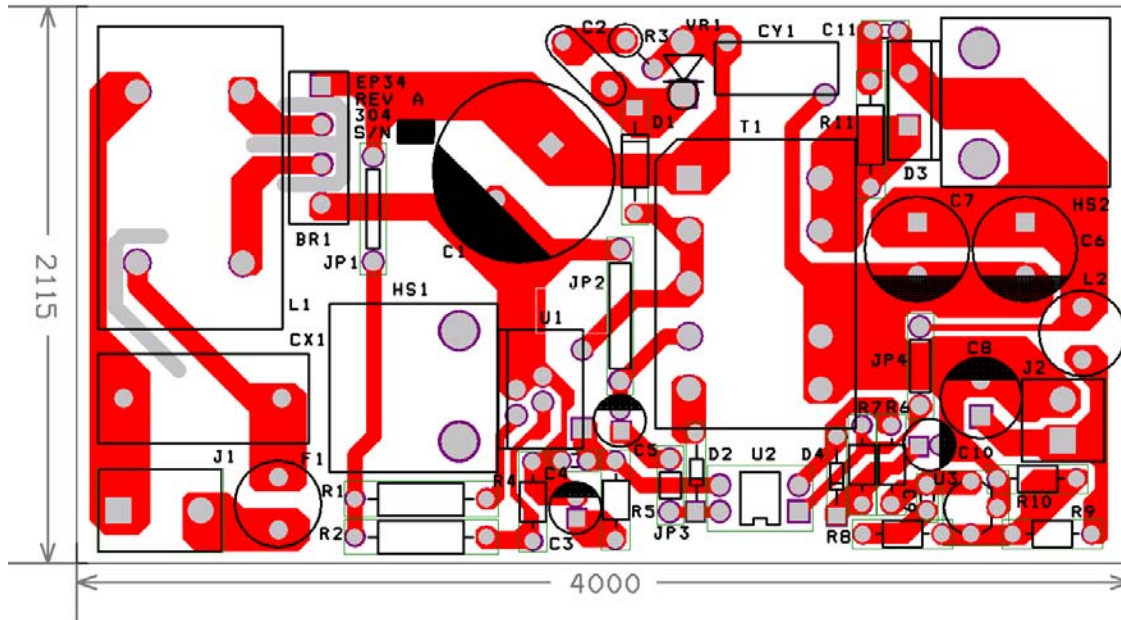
EP-34 Printed Circuit Board Layout (dimensions 0.001”).
